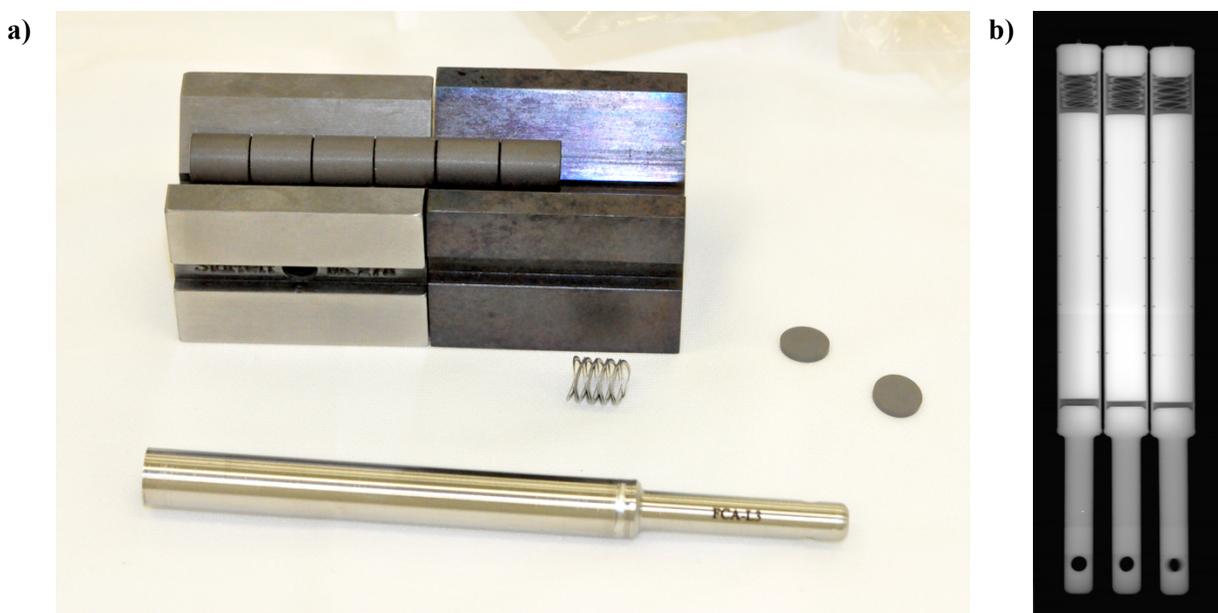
Representative ATF-1 LOCA rodlet components (a) prior to assembly and (b) after assembly using radiography. Rodlet lengths are 4.529 in. nominal.
